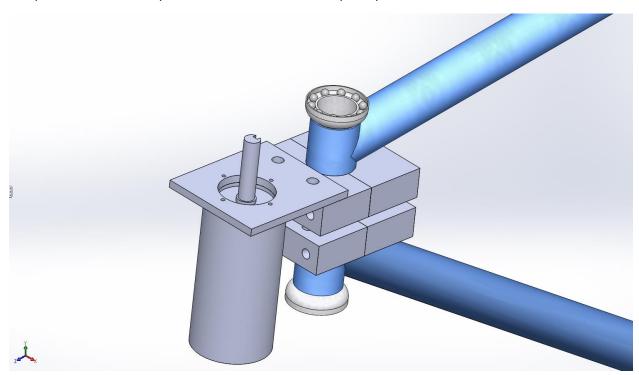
Early design for steering motor on a full size bicycle. The shaft on the motor would have been connected with a gear train to the fork to actuate motion.
